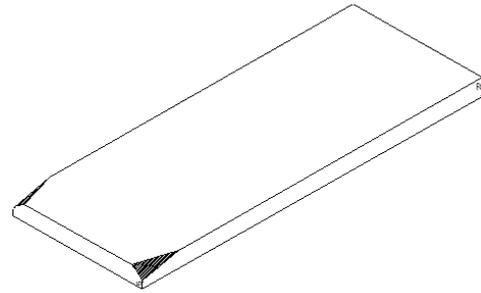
Cutting scheme 2. First stage – cutting in the sawmill
